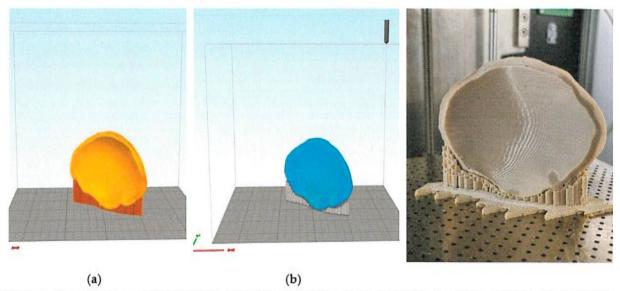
Personalized implant extrusion process: (a) Orientation of the implant in the slicing software; (b) Parameter setting and generating a g-code; (c) 3D printed cranial implant.
